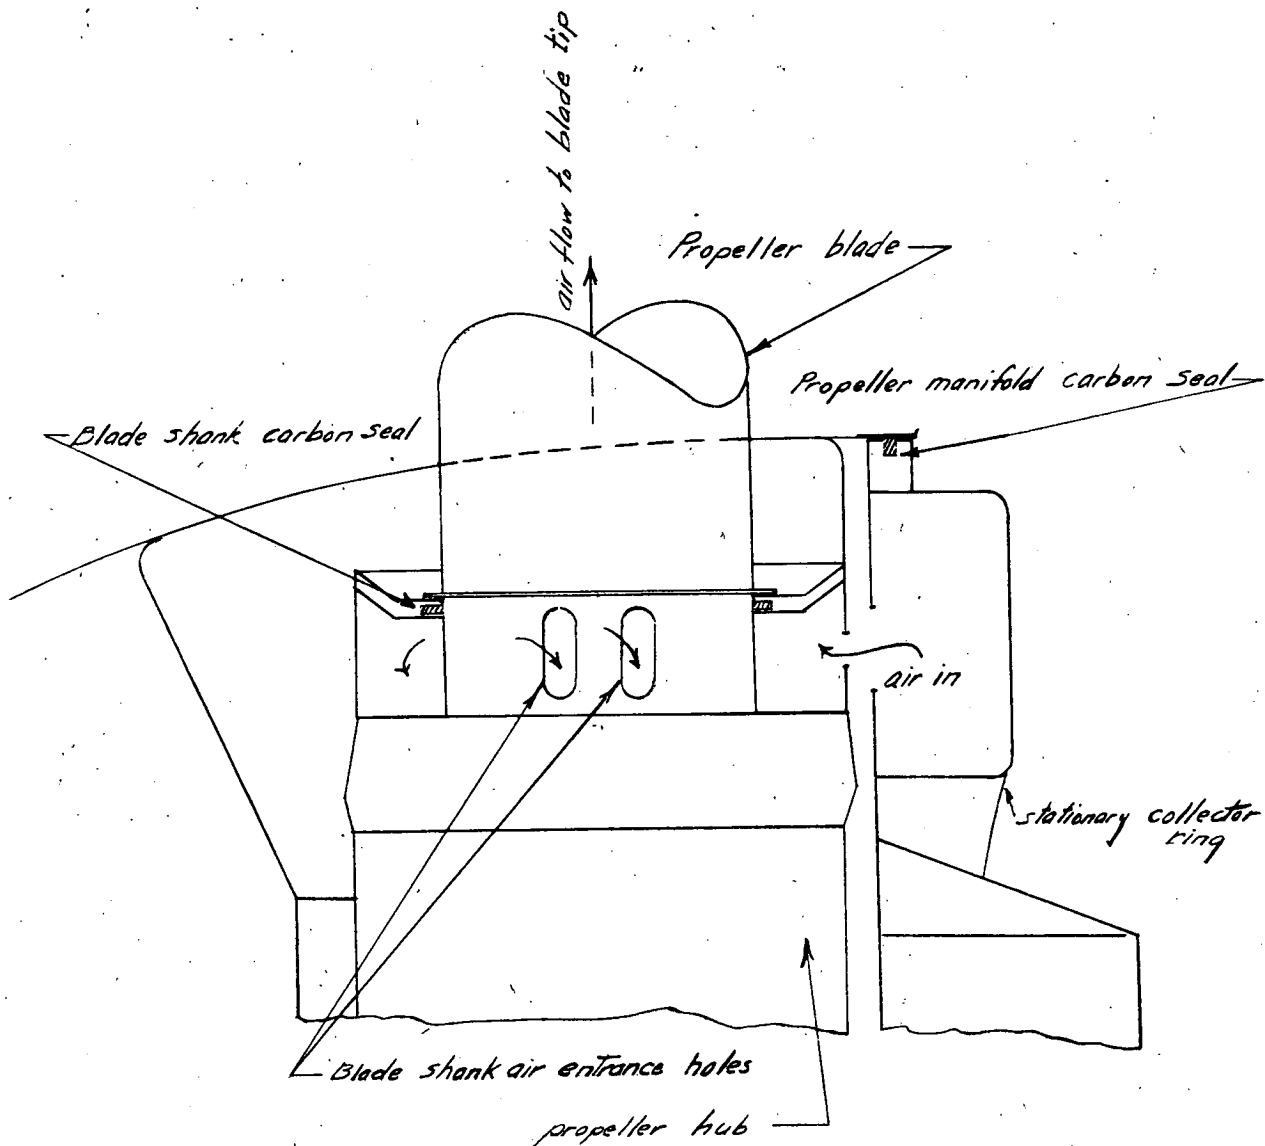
Air-heated propeller installed on the right engine of the test airplane.
